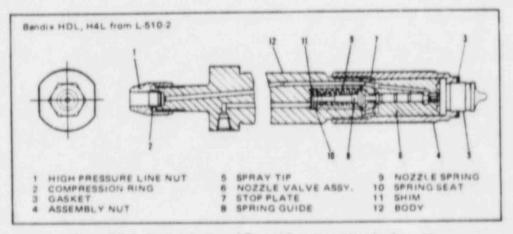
F-1. Sectional View of Typical Nozzle and Holder Assembly
